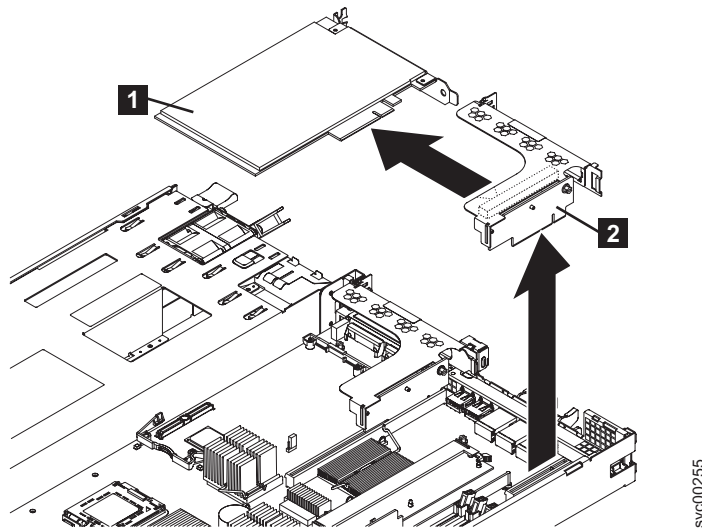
Removing the riser-card assembly from the SAN Volume Controller 2145-8G4
